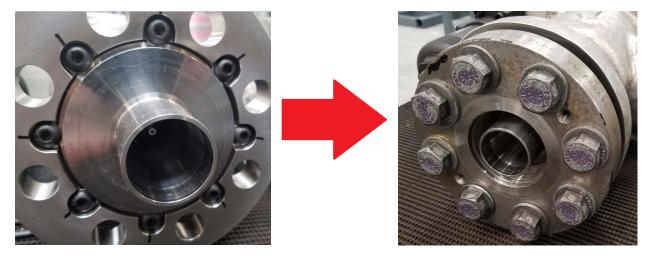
Illustration of Extension Style Diverging Sleeve
